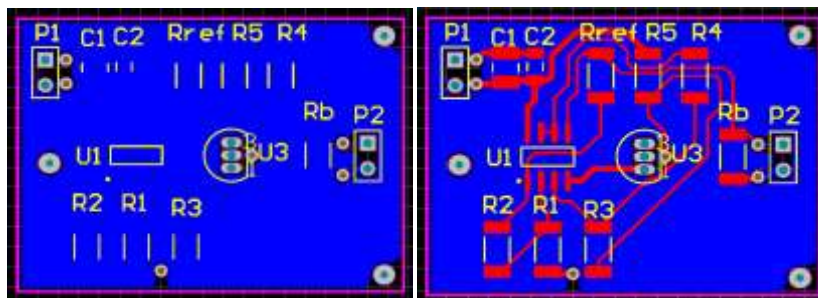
PRINTED MATTER WIT ADDED MASS GND ON THE BOTTOM SIDE.
